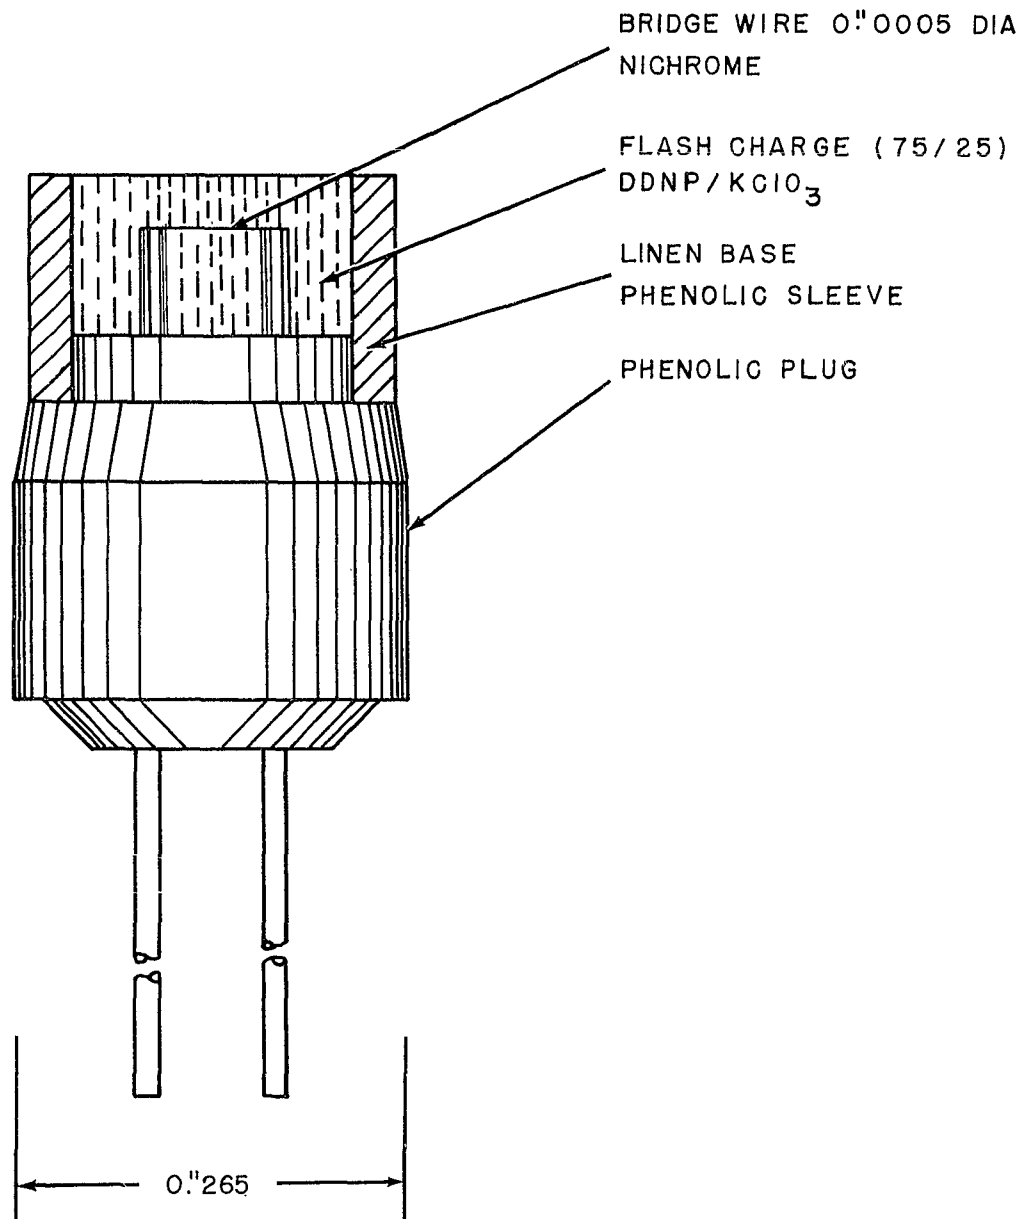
PRIMER MK 114 MOD. 0 IGNITION ASSEMBLY
